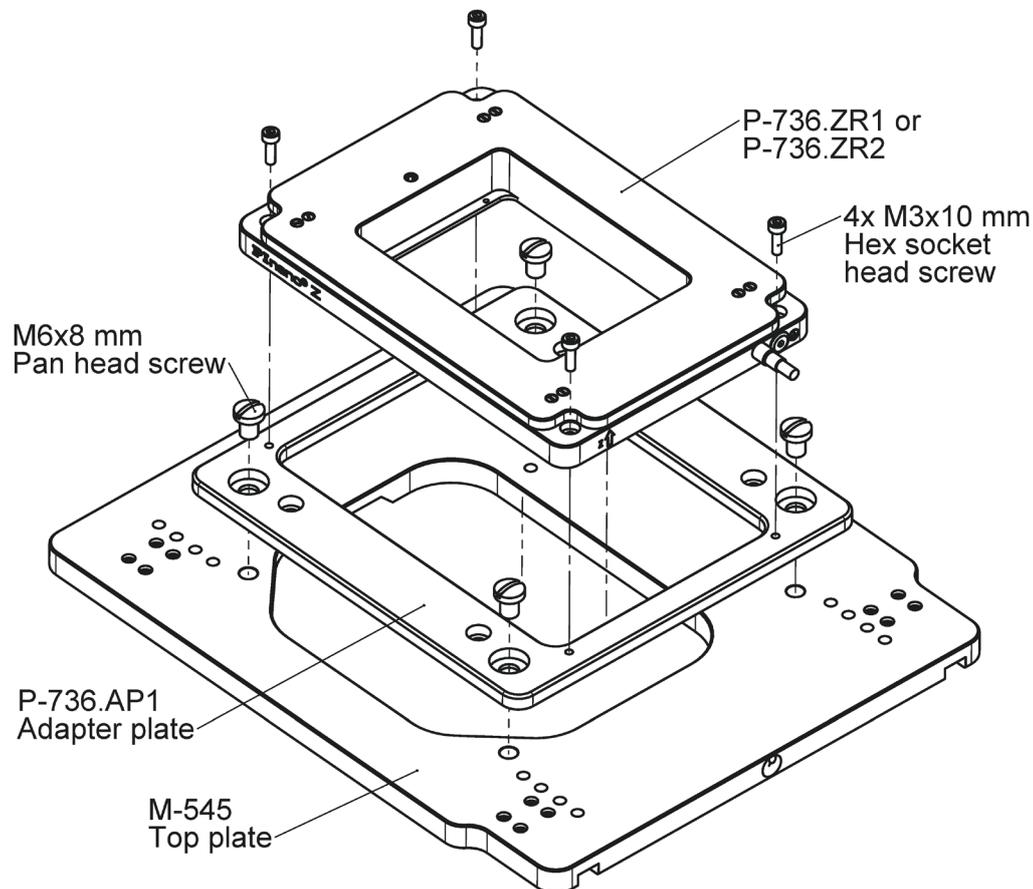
Mounting of the P-736.ZRx onto an M-545 stage using the P-736.AP1 adapter plate
